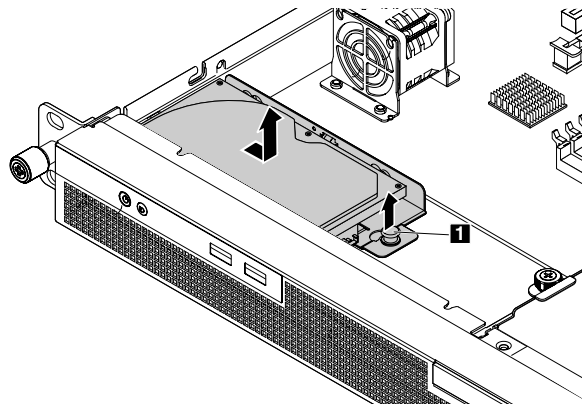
Removing the 3.5-inch hard disk drive together with the bracket
